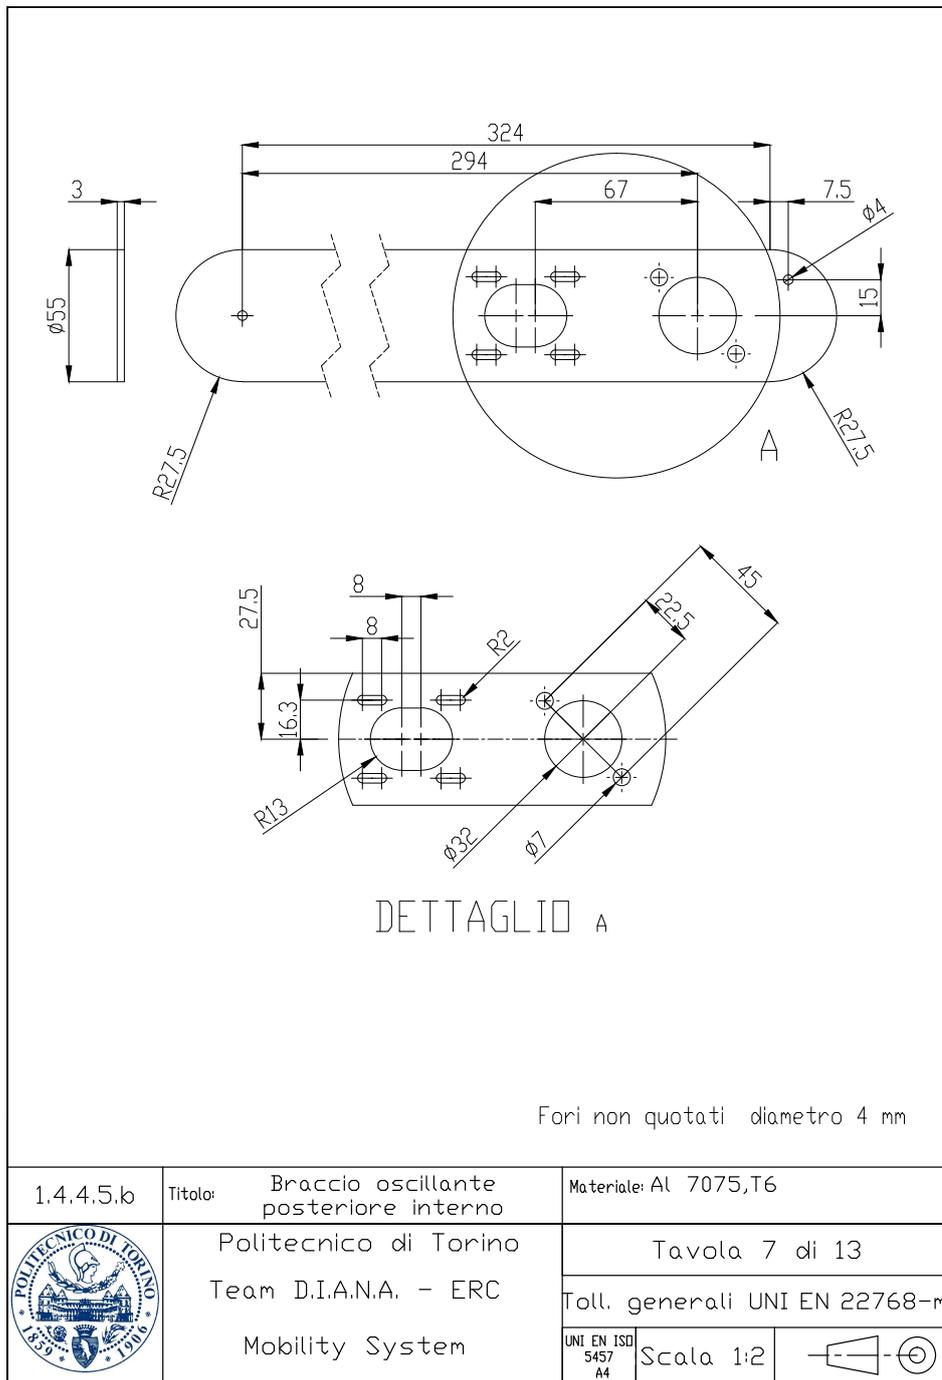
Example of swinging arm, in particular of rear wheel motor connection side.
